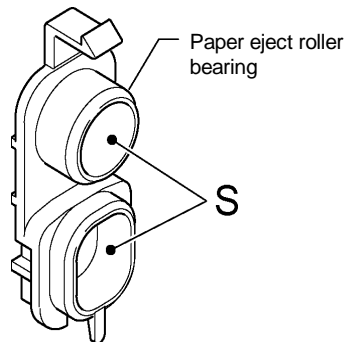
Paper Eject Roller and Paper Eject Sub-roller Shaft Bearings
